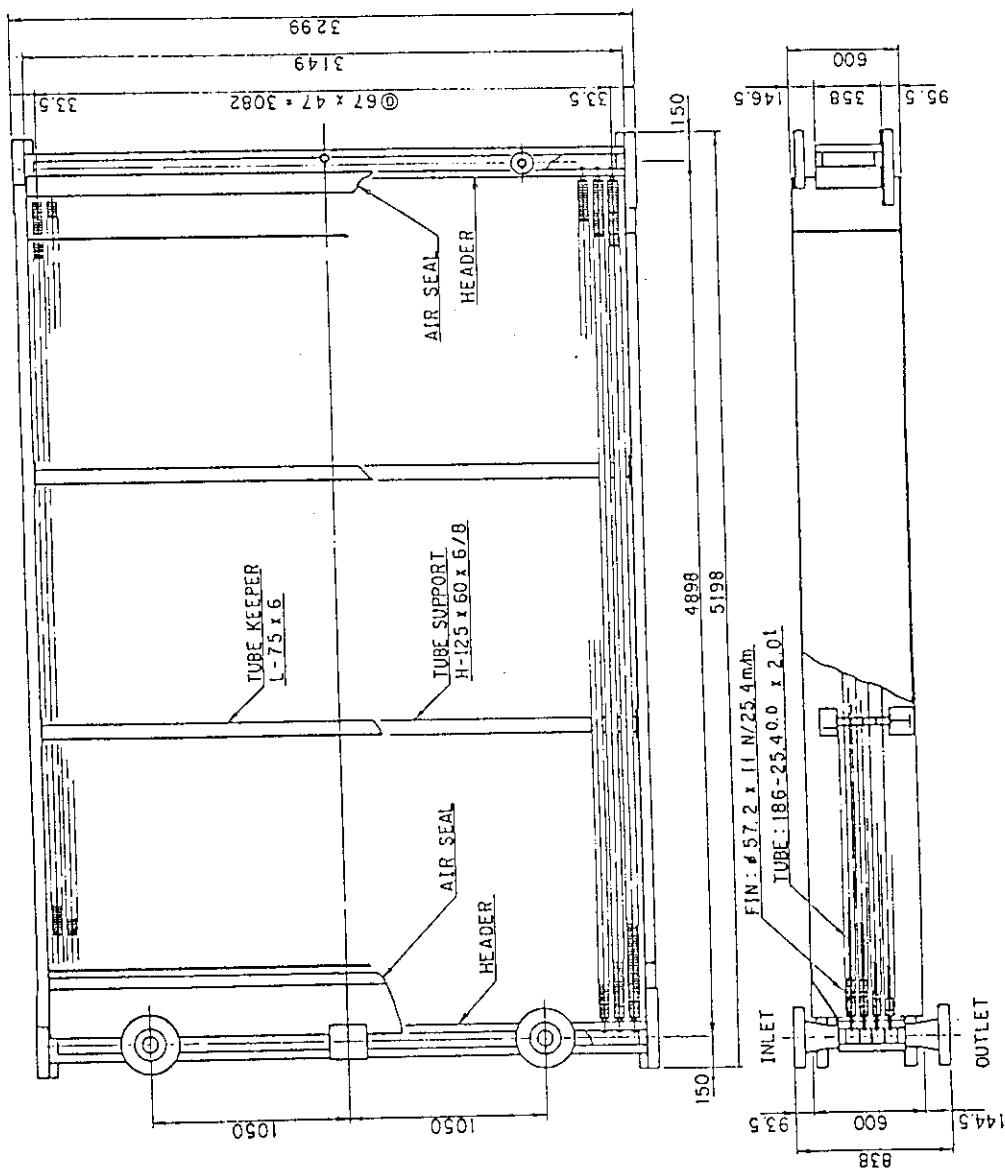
(a) Details of Cooling Tower CT-1
